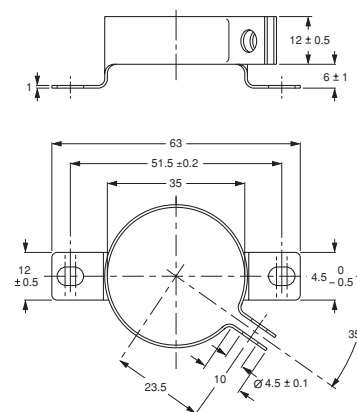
Dimensional outline of clamp for case ØD = 35 mm.
